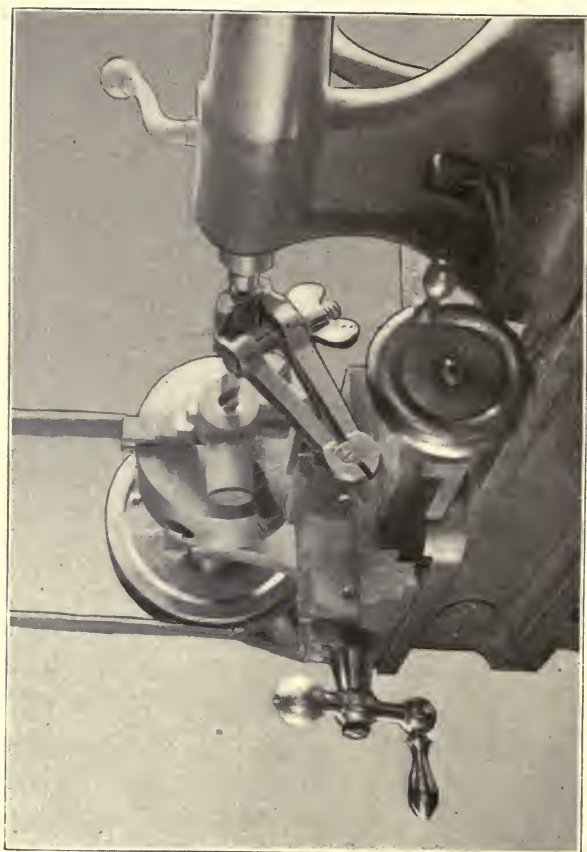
DRILLING MAIN BEARING FOR SHAFT.
